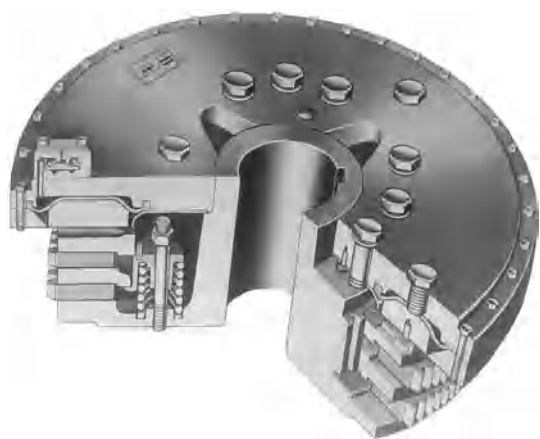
External-contracting clutch that is engaged by expanding the flexible tube with compressed air. (Twin Disc, Inc.)
